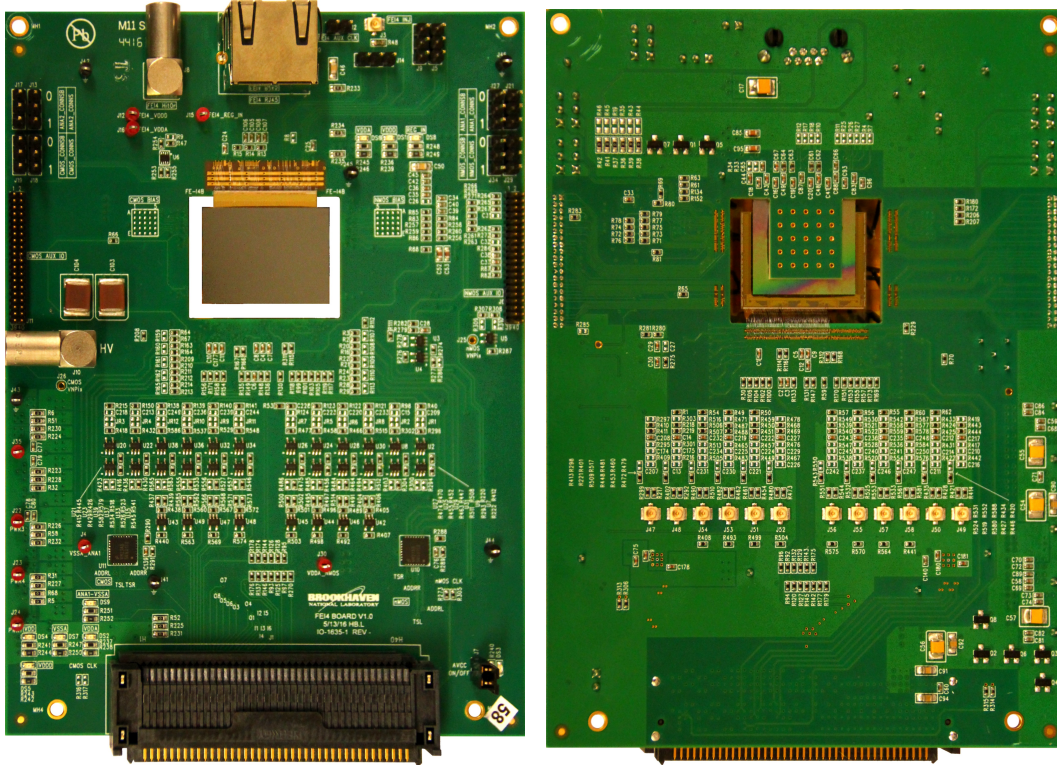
CaRIBou chip board with a H35DEMO assembly. The FE-I4 readout ASIC is glued and wirebonded onto the top side (left) of the PCB while the first three matrices of the H35DEMO are wirebonded onto the pads on the back side (right) of the PCB.
